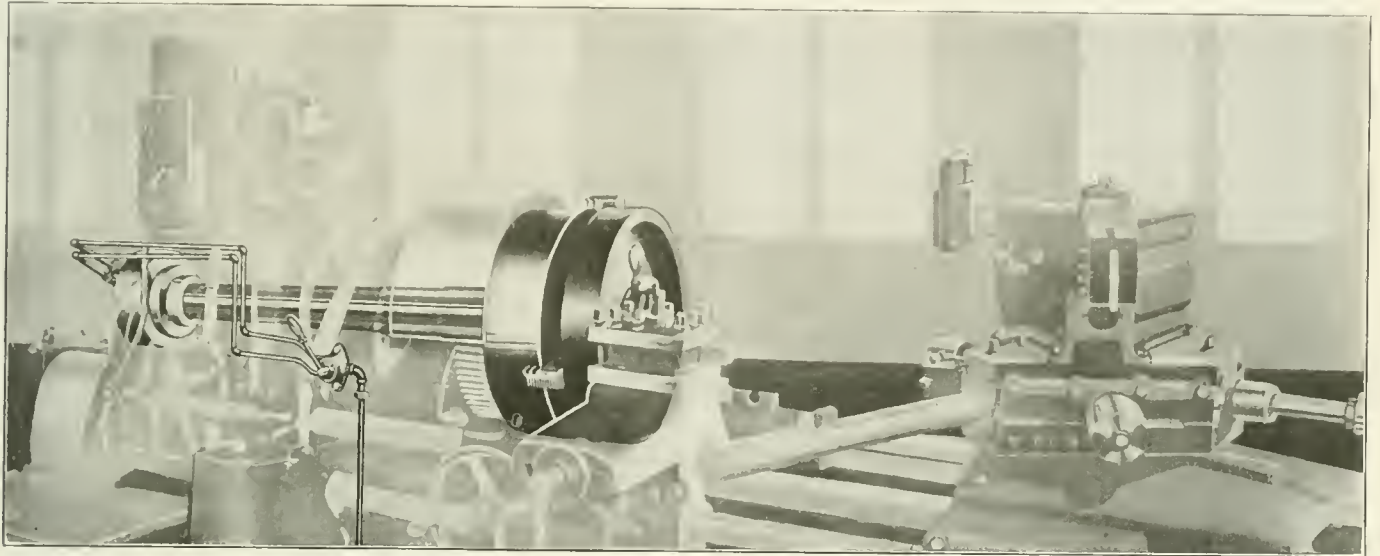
Logan 24-in. Air Operated Chuck Applied to Heavy Duty Turret Lathe
